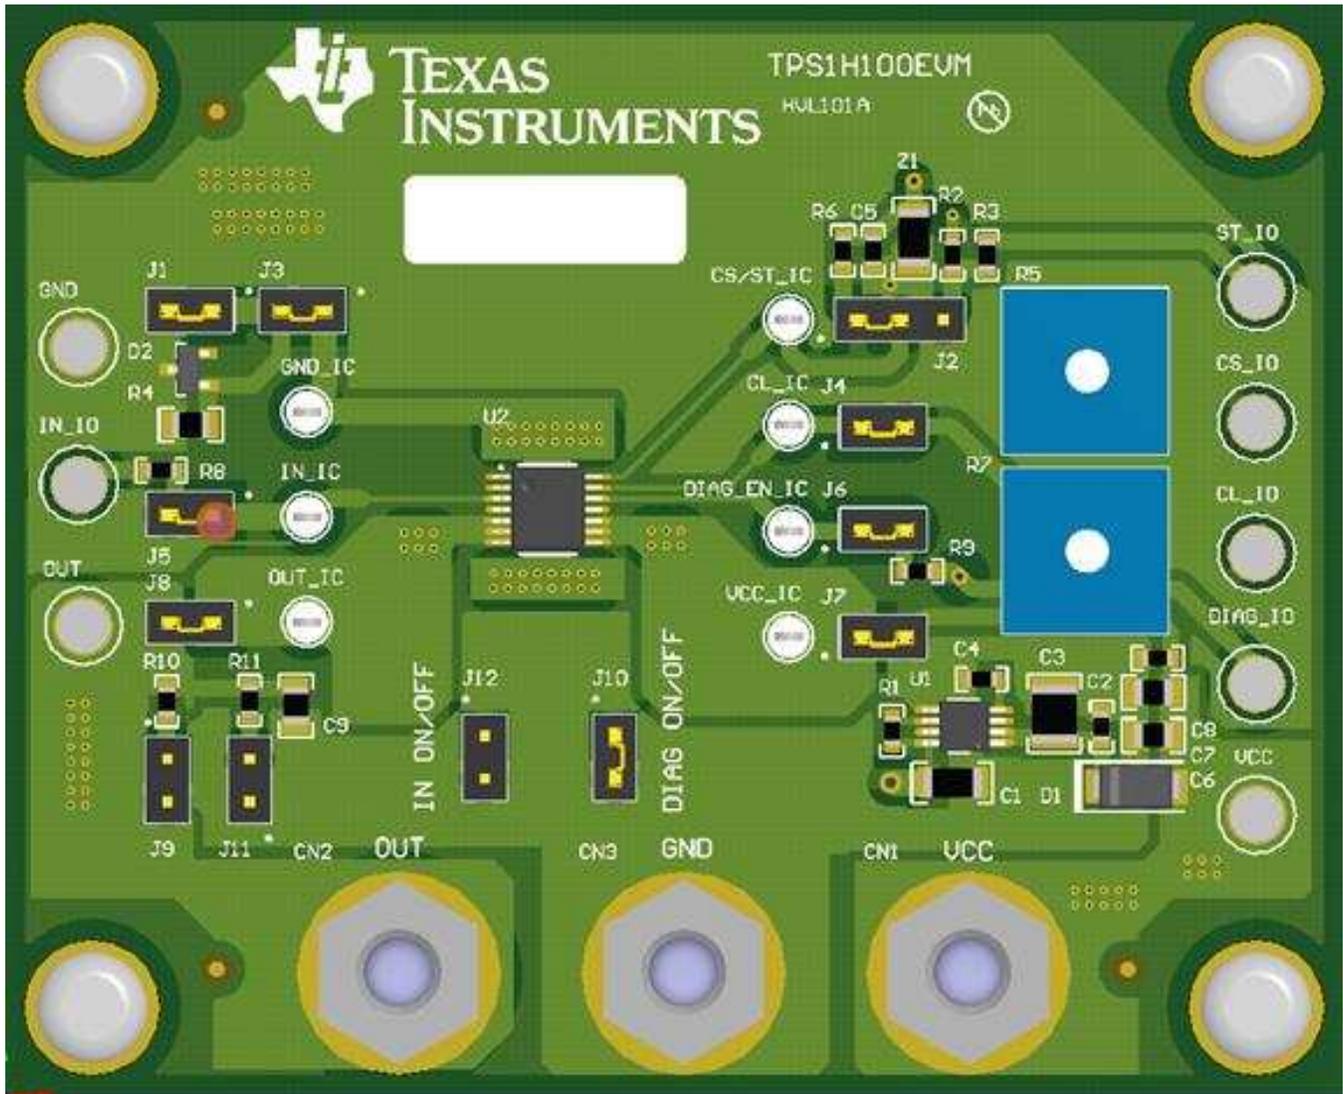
TPS1H100-Q1 EVM Component Placement (Top View)
